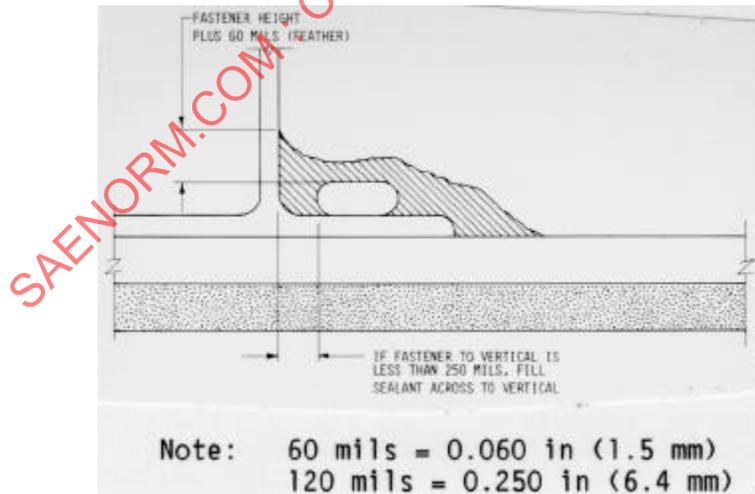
Sealing Fastener Near a Vertical Surface
